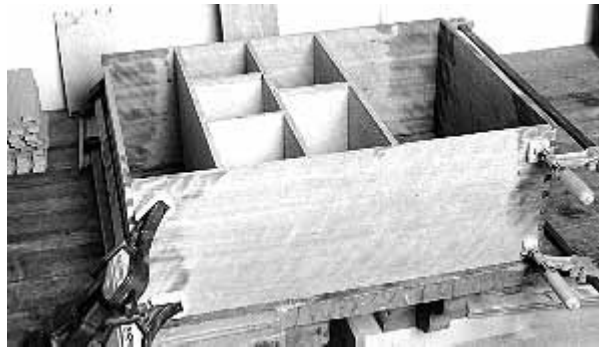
When gluing up the carcass, don't apply any more pressure than is required to bring the joints together, or you may bend the parts. Check the box for square.
